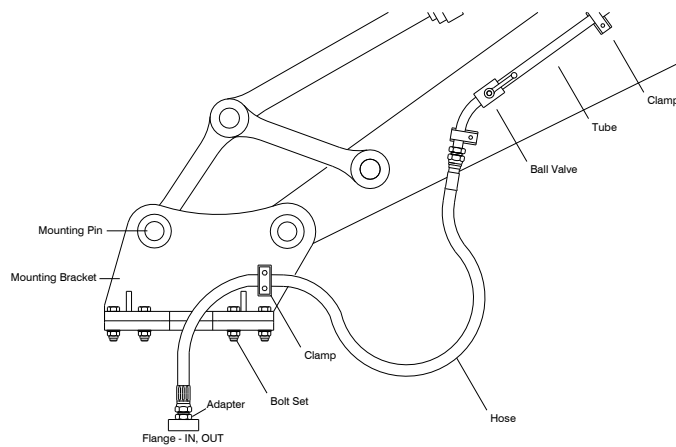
Hydraulic Hose Routing To Excavator - Typical
